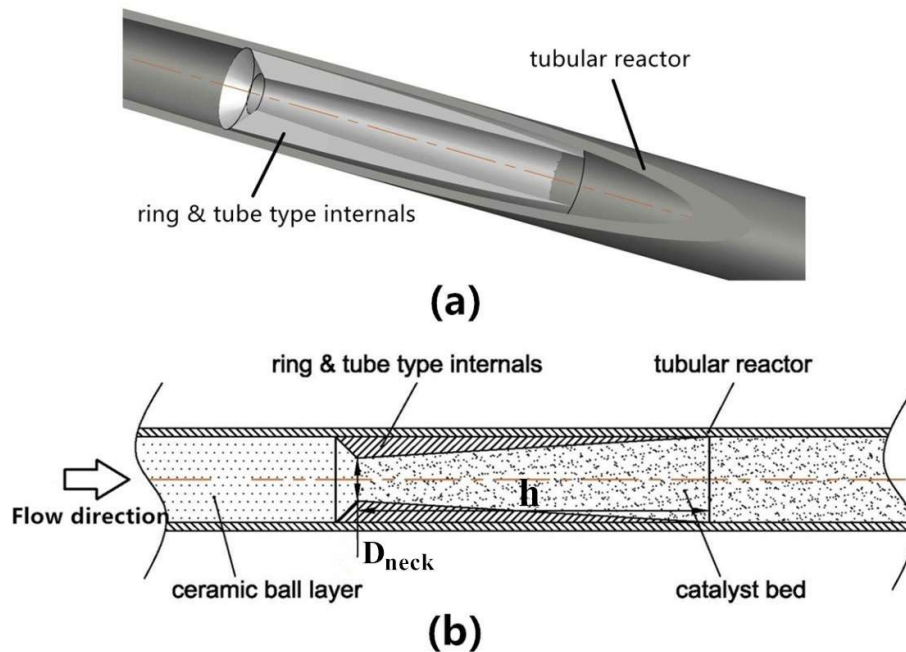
Drawing of the assembled internals (a) and a sectional view (b) of ring & tube type internals
